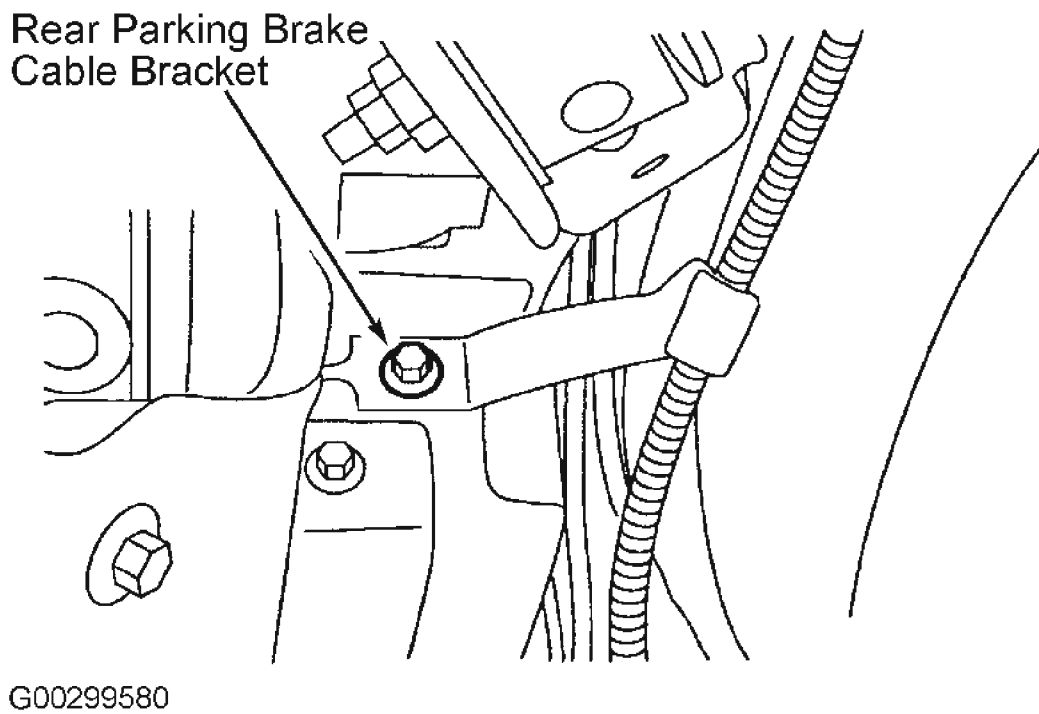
Identifying ABS Cable Bracket Bolt
